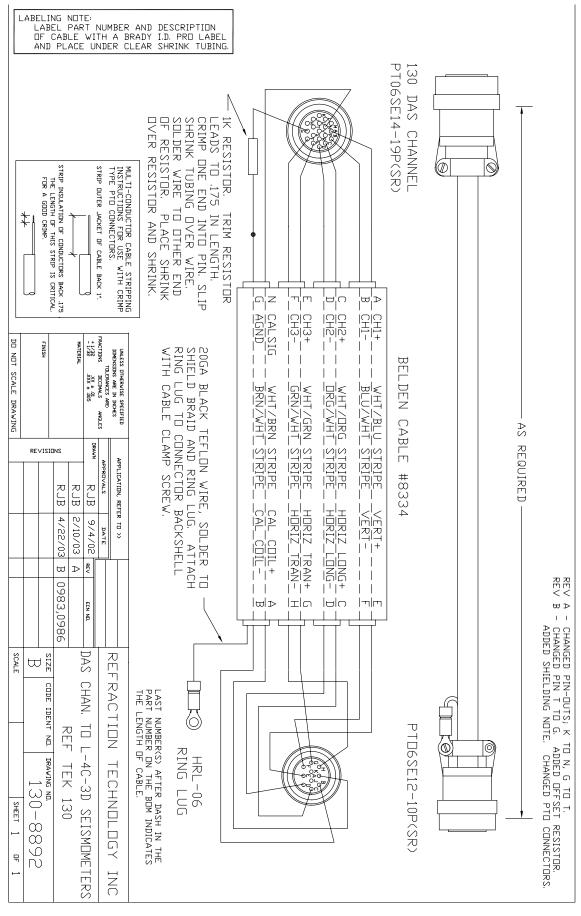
37 130-8892 - DAS to L-4C-3D Seismometer
